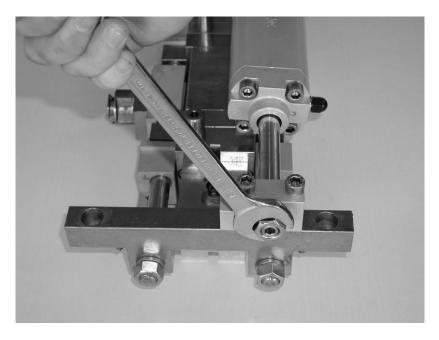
Tighten the locknuts on the side of the setting mechanism
